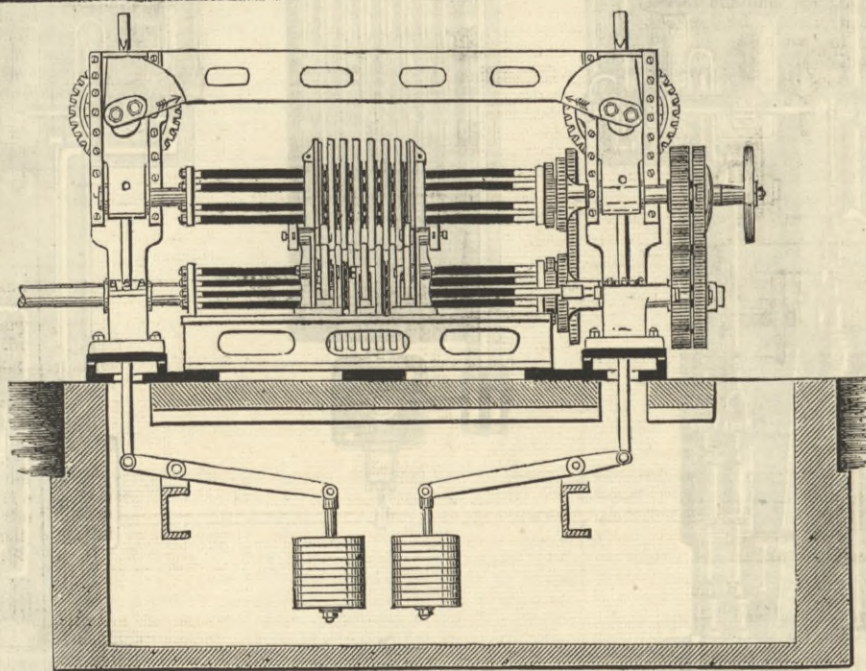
ROLLING MILL FOR CORRUGATED SHEETS
